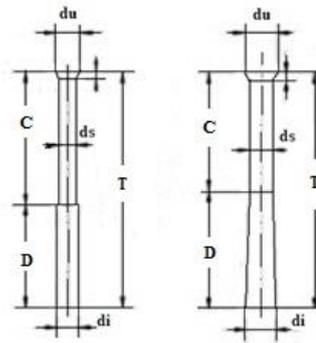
Shapes of flat die holes, cylindrical and tapered (www.generaldies.com)
